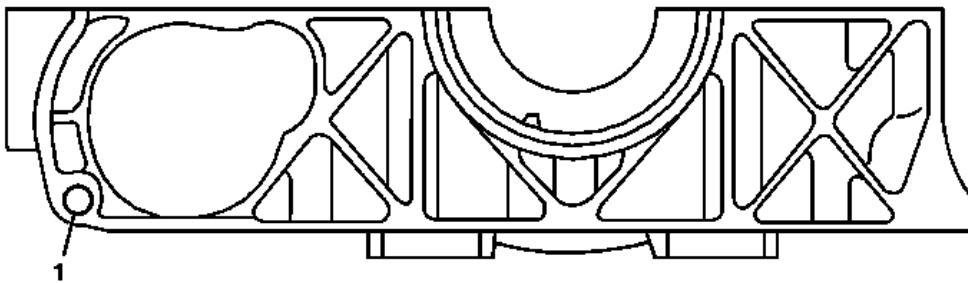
Identifying Bolt Size & Locations On Lower Crankcase - Back
